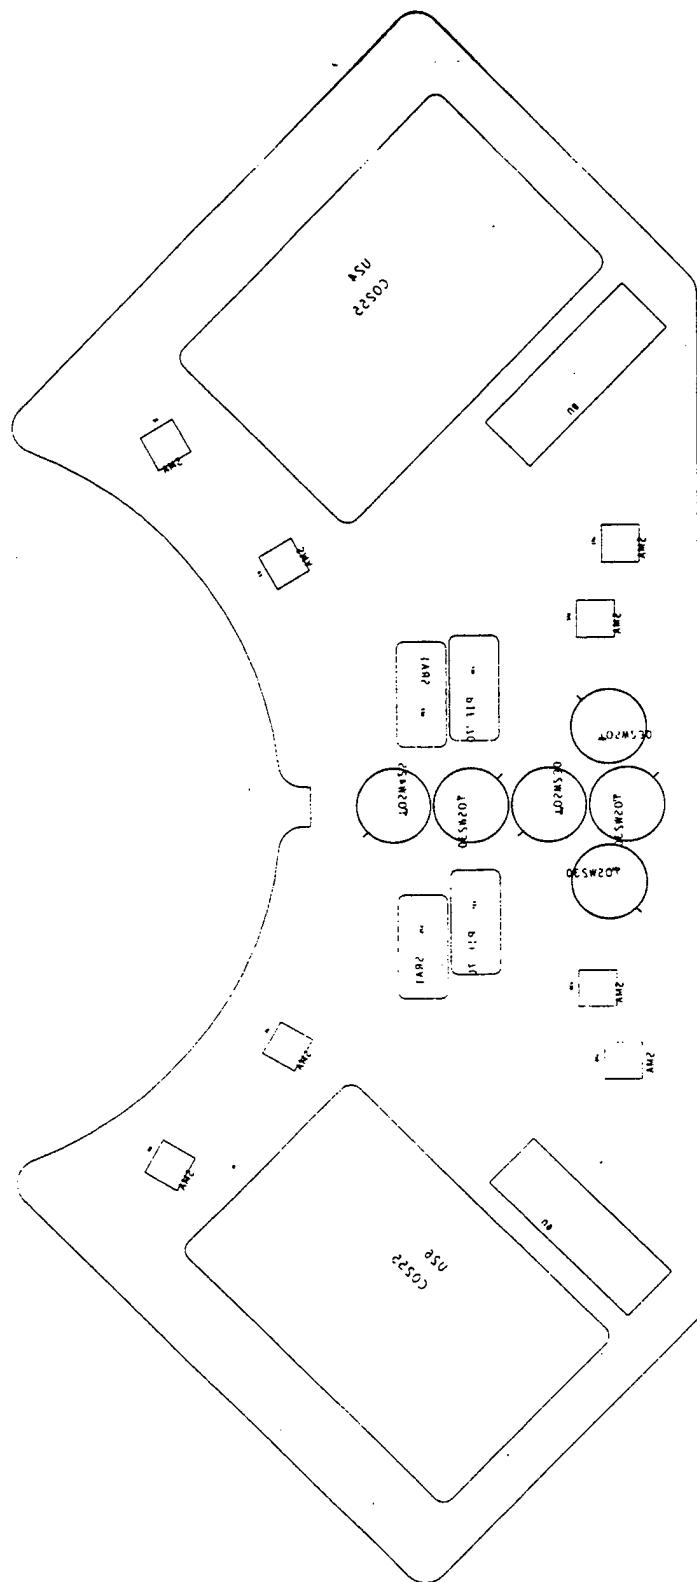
RF Switching PCB - Bottom Assembly Drawing
